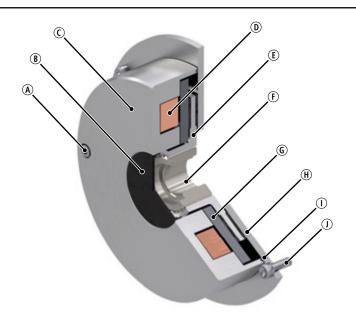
Layout of an INTORQ BFK552 spring-applied brake (sealed version) + rotor + flange
